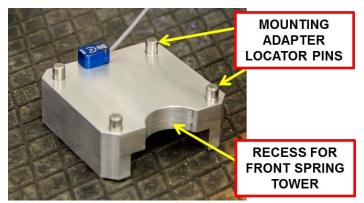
Angular rate sensor installation on neck mounting adapter
